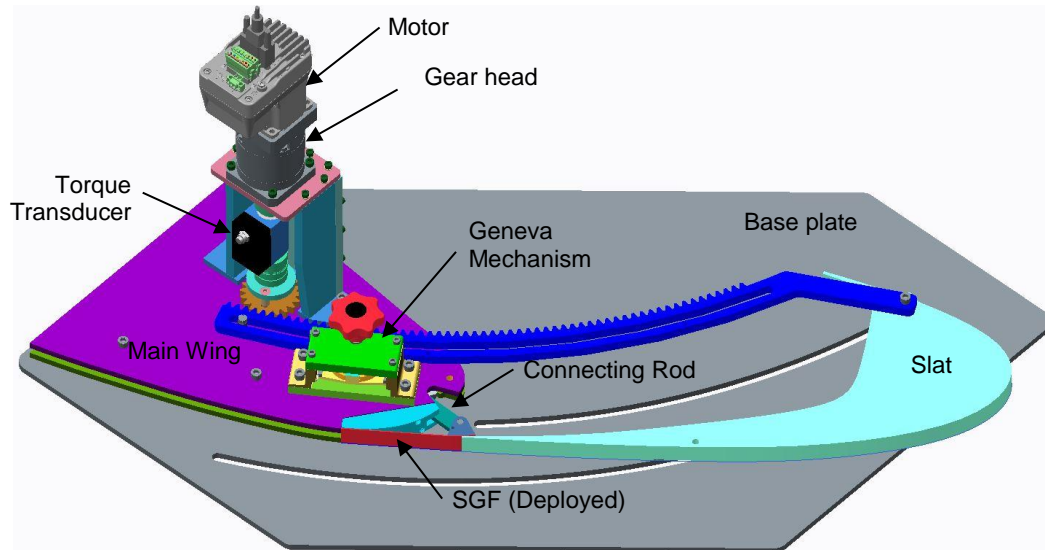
Top view of the CAD model for the mechanized SGF benchtop model with the drive mechanism.
